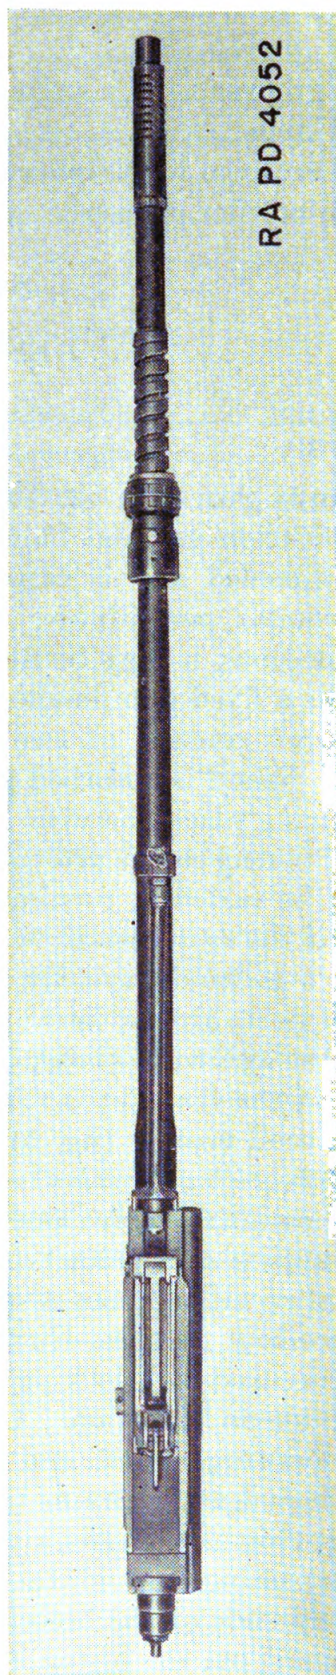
20-mm automatic gun M2, general assembly, top view.
